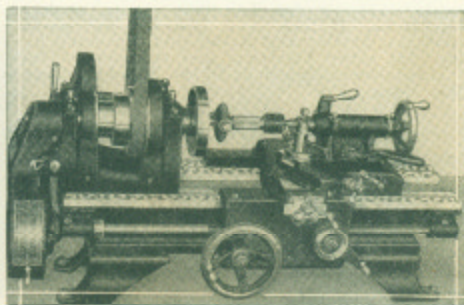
Cutting the Thread on a Master Screw Thread Gauge
